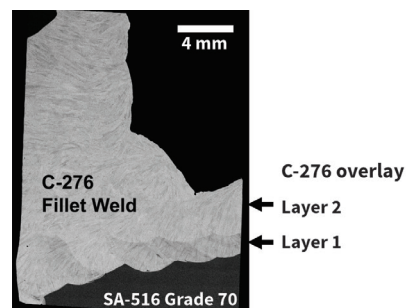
SEM backscattered electron image montage showing the cross section of a corner joint weld of two SA-516 Grade 70 base plates along with two layers of weld overlays made using C-276 weld.
